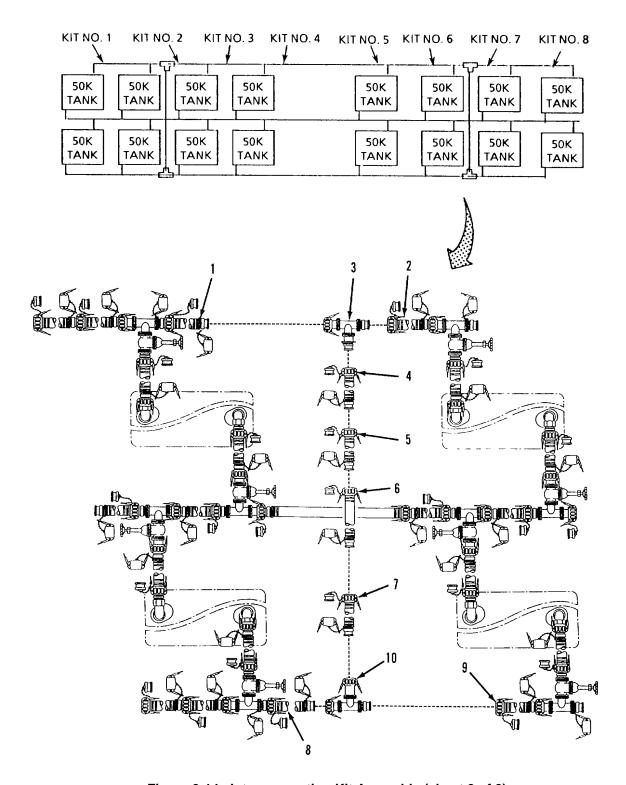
Interconnection Kit Assembly (sheet 2 of 2).
